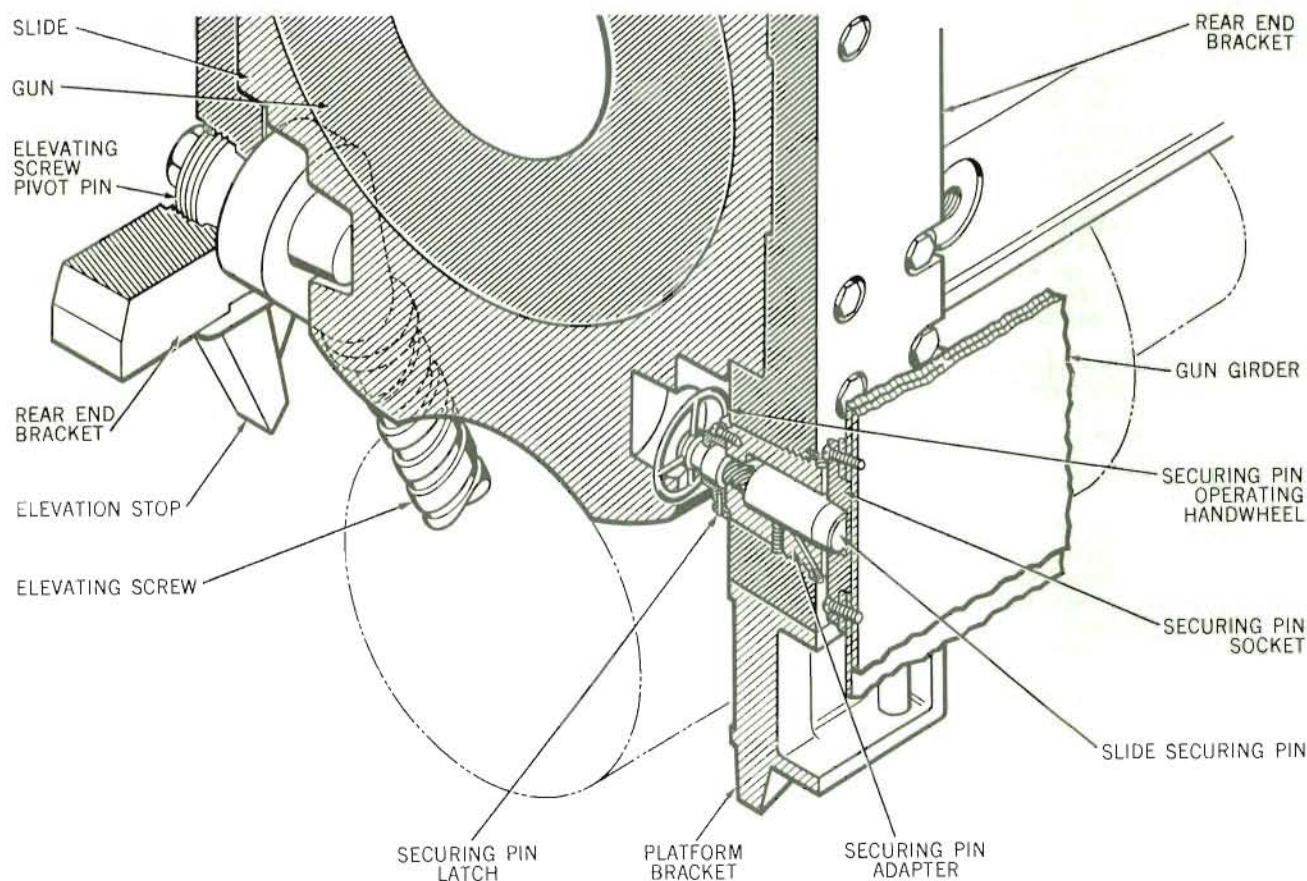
Slide Rear End Brackets, Slide Securing Device and Elevating Screw Pin, Sectional View
